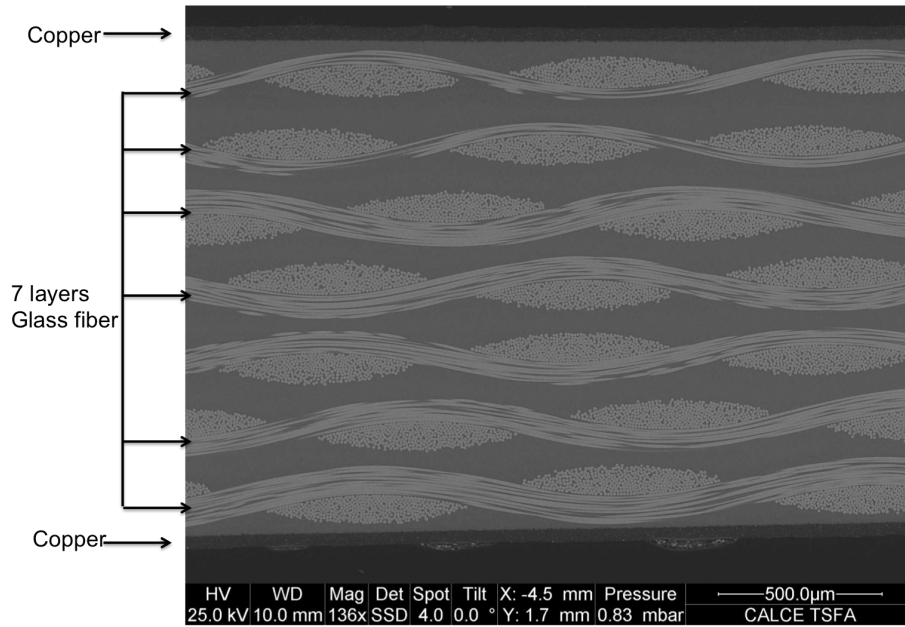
PCB cross sectional view showing PCB layers configuration
